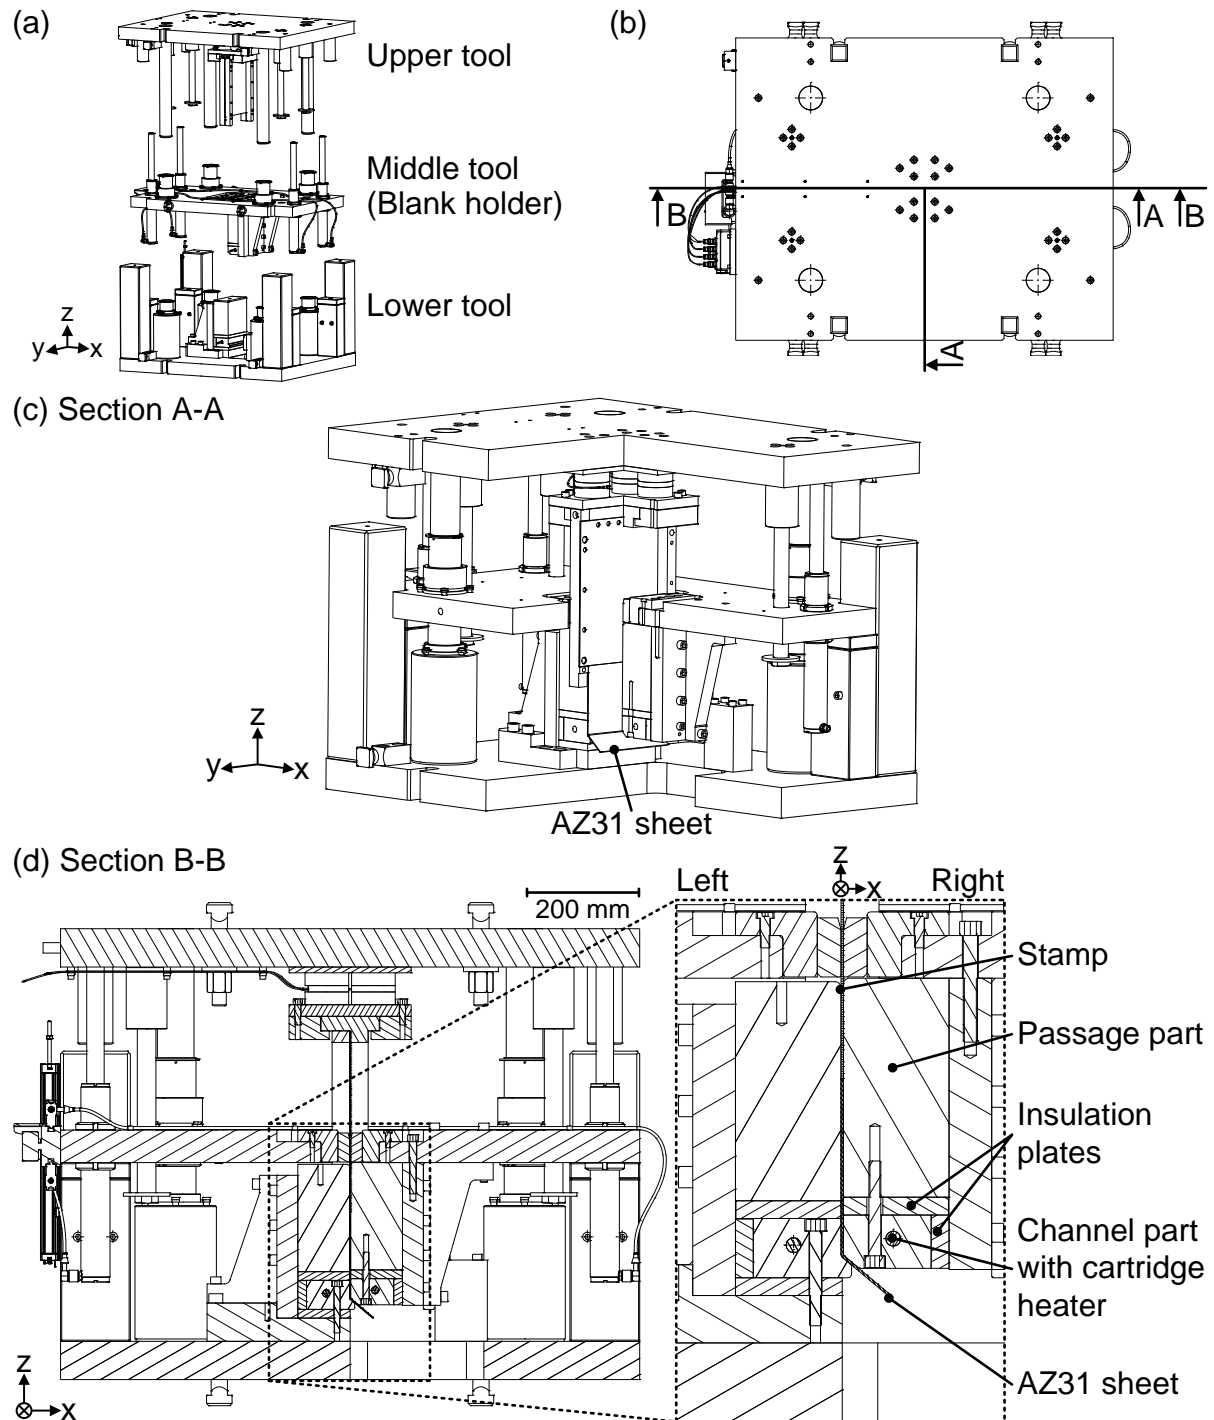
Description of developed ECAP tool: (a) main assembly modules of ECAP tool, (b) top view, (c) section A-A, (d) section B-B [SUH15]
